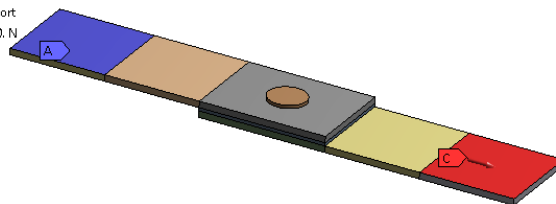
Boundary condition of Lap Joint -40 Mm With Adhesive
